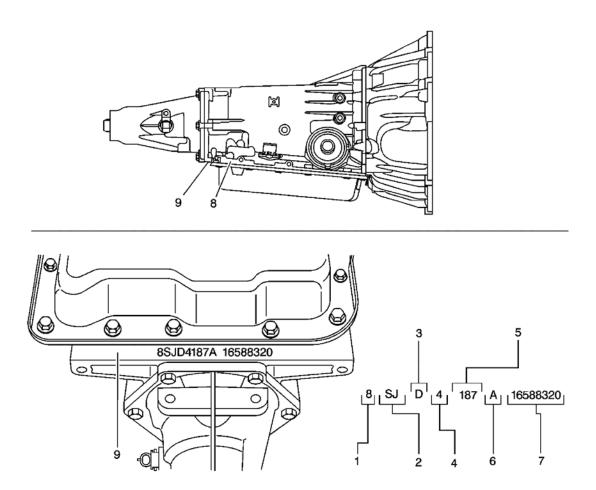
Toledo Build Courtesy of GENERAL MOTORS CORP.
